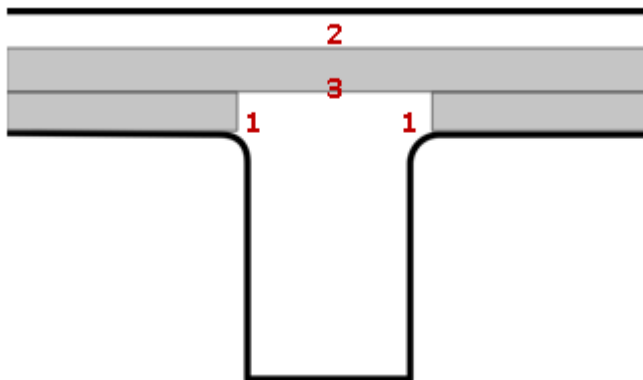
Flow fronts creating a weld line[46]
